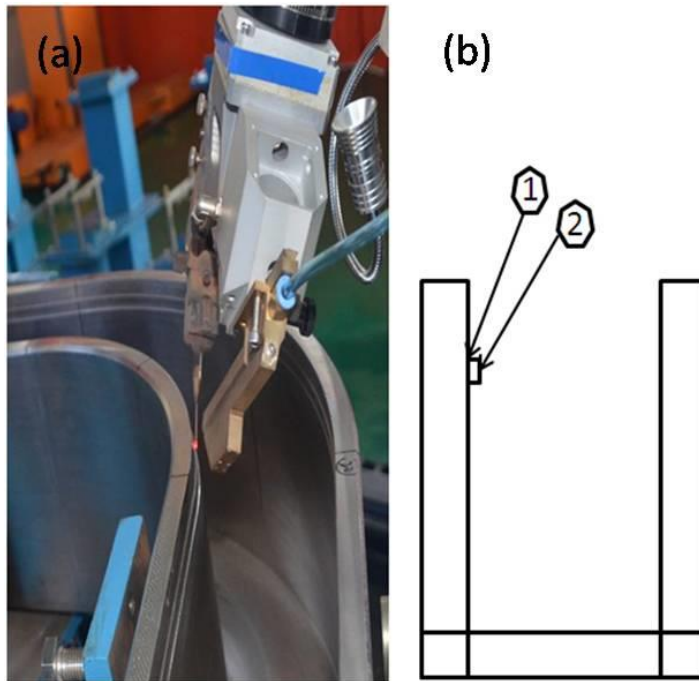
(a) The schematic diagram of robot weld backing strip on the U-shaped case (b) two welding scheme
